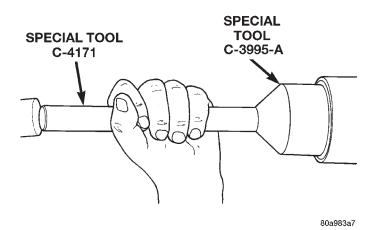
Extension Housing Seal Installation EXTENSION HOUSING
